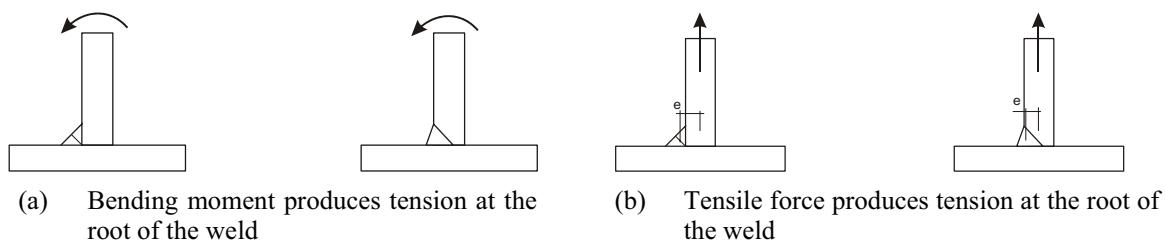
Single fillet welds and single-sided partial penetration butt welds
